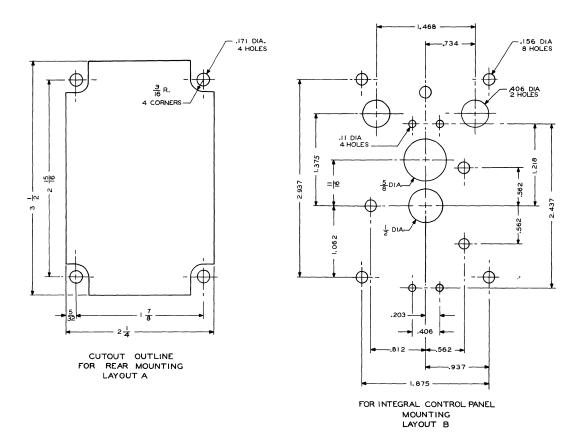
Remote Control Unit 614D-1, 614D-2, Mounting Layouts
